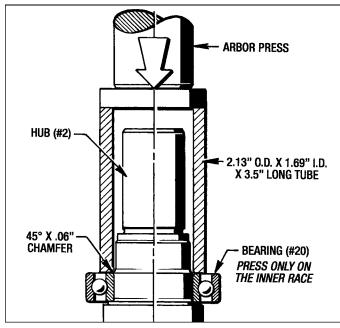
Installing Bearing (#20) on to Hub (#2)
